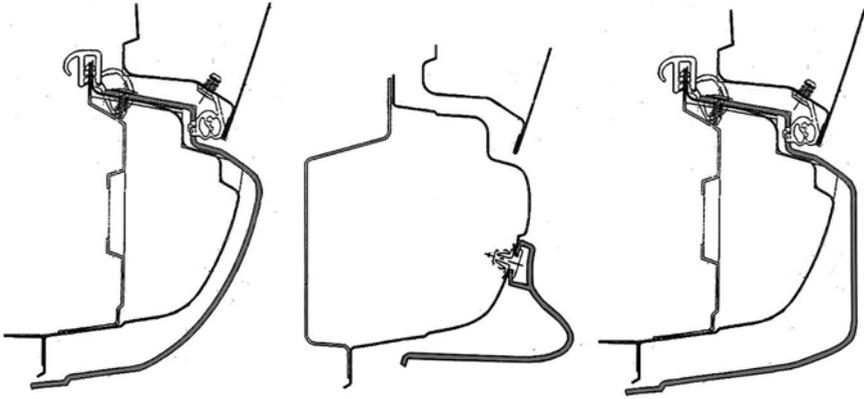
Typical sill cover sections, where snaps to sill and cover overhang are visible.
